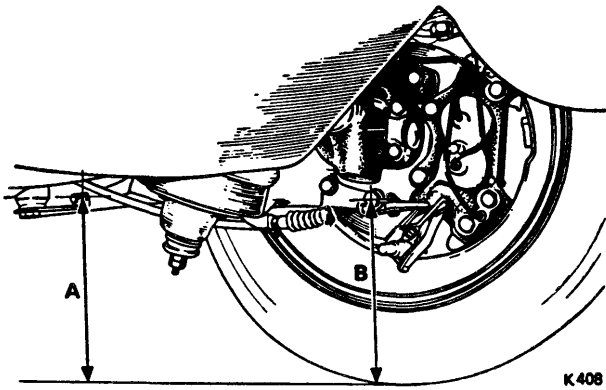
CAR HEIGHT CHECKING POINTS—REAR
